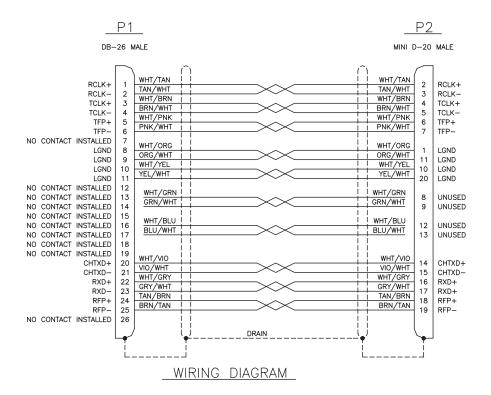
Terminal/Printer Cable (P/N 830-0535-xx)
